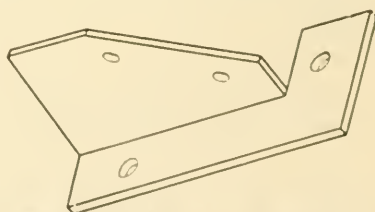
A.—Lower special throat spring bracket, Case-Osborne corn binder
